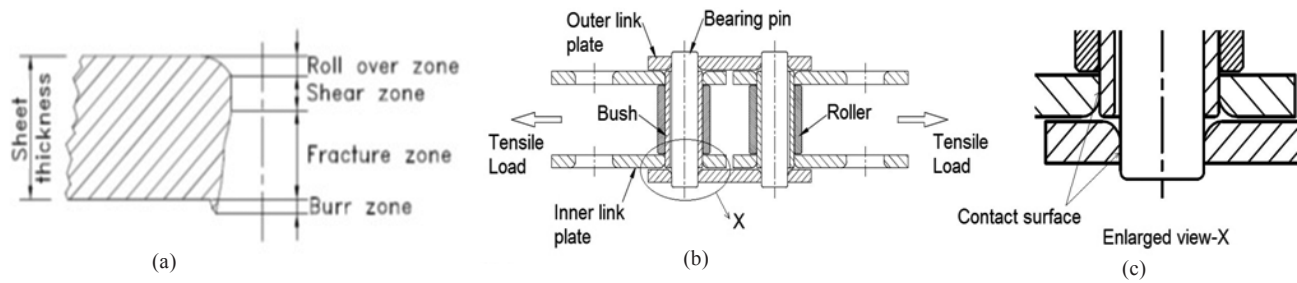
(a) Different zones of conventional piercing process, (b) Roller chain assembly and enlarged view of bush, bearing pin contact surface with link plates.
